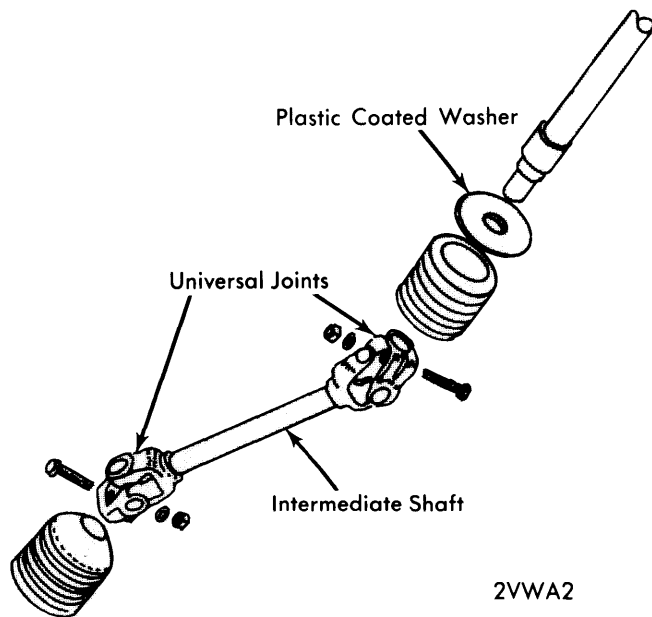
Super Beetle Intermediate Shaft Connections and Related Components
